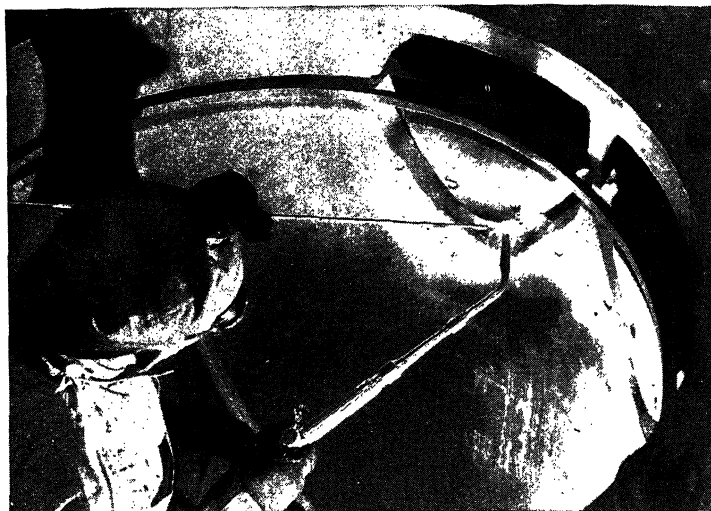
Bronze welded repair on a main cylinder in a cargo vessel.
